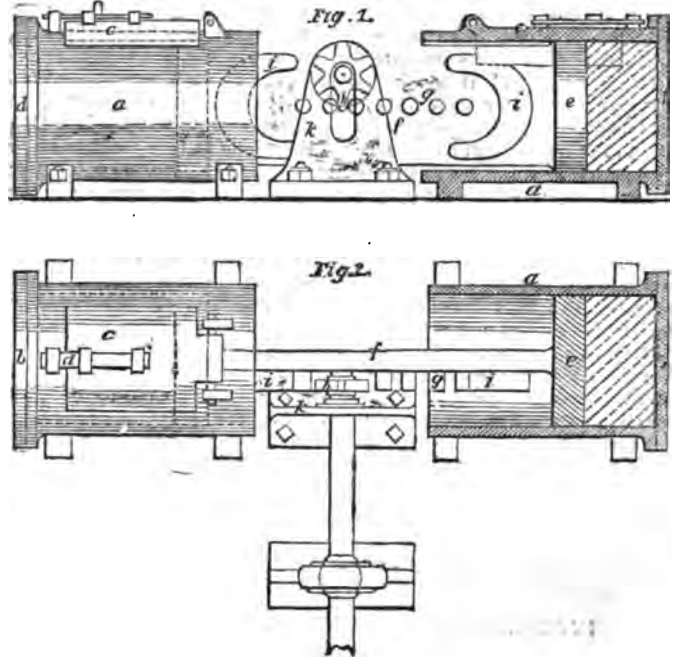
, is a side elevation of the machine, partly in section, to show the interior construction; and fig. 2, is a plan, also partly in section. In this arrangement two horizontal fixed cylinders are employed, furnished with dies at their outer ends, and doors on the upper part for the admission of clay, which is forced out through the dies by the action of pistons working within the cylinders, in the manner commonly practised. The peculiarity consists in the mode of working the pistons. *a, a*, are the horizontal cylinders, secured to a bed-plate; *b, b*, are suitably-formed dies, bolted to the outer ends of the cylinders; *c, c*, are doors hinged to the cylinders with a bolt *d*, for securing them; *e, e*, pistons, attached together by a plate *f, f*. Upon one face of this plate are pins *g, g*, into which a pinion *h*, takes alternately on the upper and under side thereof. *i, i*, are semi-circular guides attached to the plate *f, f*, and intended to keep the pinion, when it has arrived at either end of the series of pins, still in gear therewith, in order that the traverse of the pistons may be continuous. The pinion *h*, is mounted in a slotted bearing *k*, and its axle may be provided with a winch-handle, for communicating a rotating motion to the pinion. The cylinders *a*, are filled alternately with clay by the door *c*. When the cylinder is filled, the door is closed, and the rotation of the pinion *h*, will then bring forward the piston, and cause the clay to find an exit through the die *b*. While this is being effected, the other cylinder is ready to be charged with clay, which in its turn will be forced out by the return motion of the pistons. It will now be understood that the continuous rotation of the pinion *h*, in one and the same direction, will force the pistons alternately forward in their respective cylinders, and cause them to press the clay contained therein through the dies attached to the ends of the cylinders. In some cases, instead of filling the cylinders by hand, as is the plan generally adopted, the patentees propose to attach a hopper to each cylinder, whereby the clay may be fed in by the rotation of "sweepers" or arms, set
